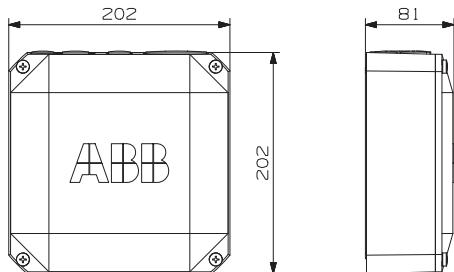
Motor sizes 100 – 160 CH, CM and CN, standard design with 3 terminals
